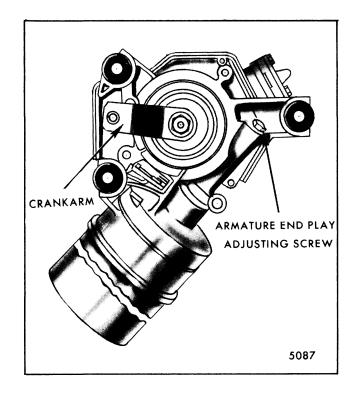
Wiper Motor and Crank Arm in Park Position
